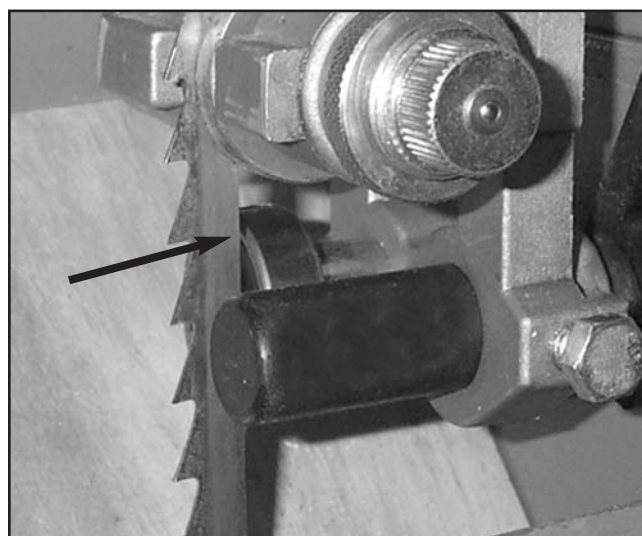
Loosen these bolts to adjust upper bearing assembly laterally.
